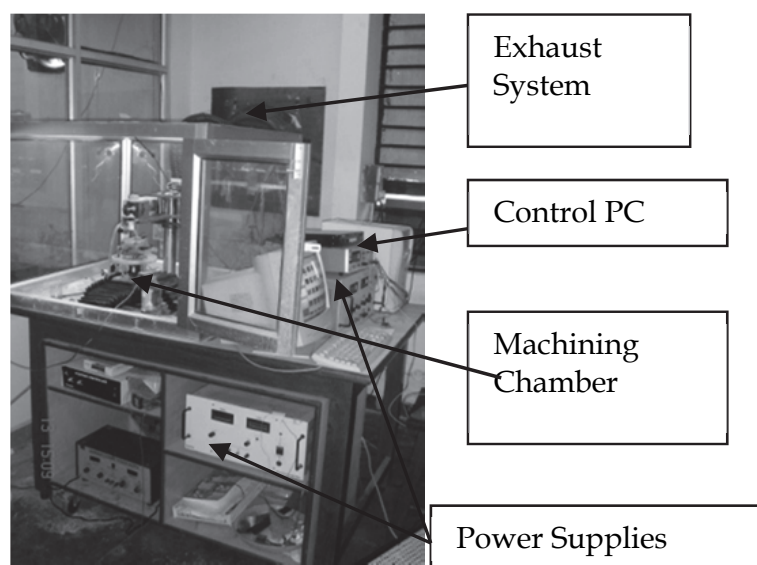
Photograph of experimental set-up (Kulkarni et al., 2011b)
